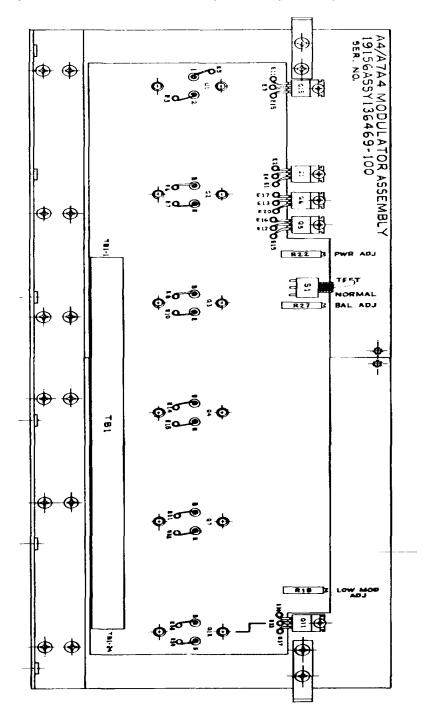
Modulator Assembly Circuit Card Assembly, 1A4A4 Parts Location Diagram
